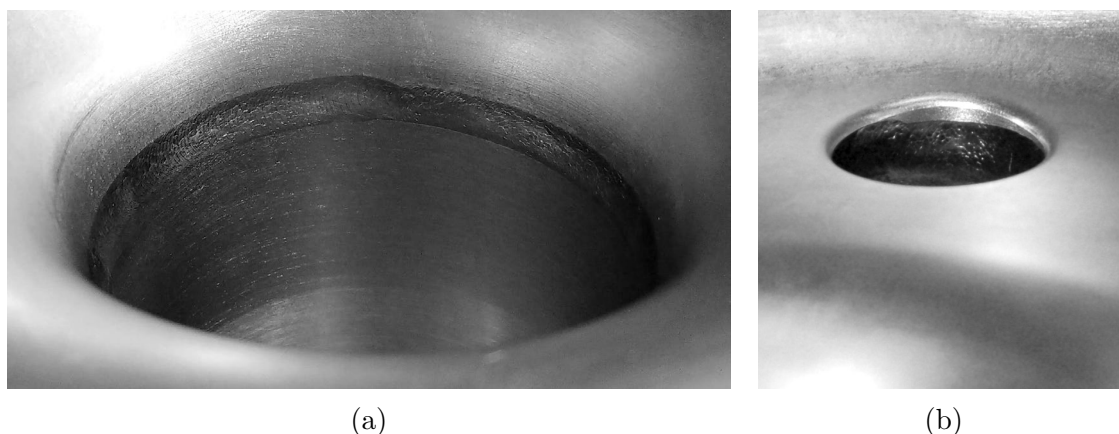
The downstream end cap welds, a) on the beam pipe, and b) on the RF port. Both images show the overlapped section of weld.
